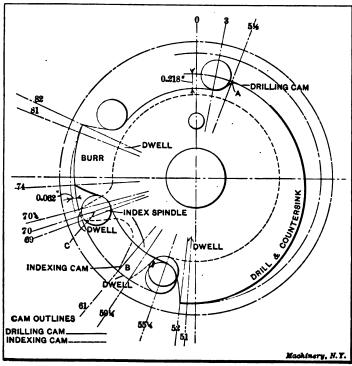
Indexing and Drilling Cams for the Piece shown at A in Fig. 14
